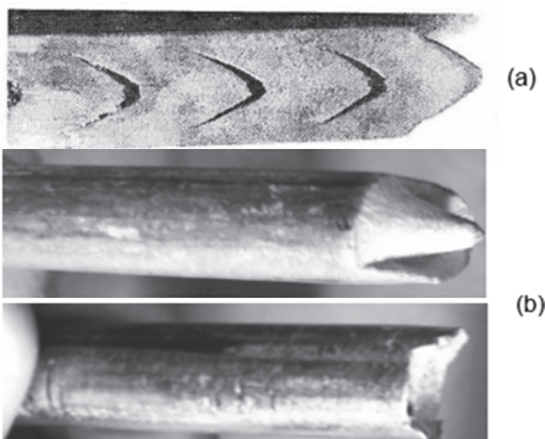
Examples of cracking: (a) – chevron cracks; (b) – cup-and-cone crack.
